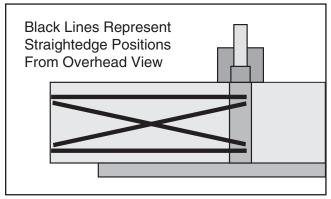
Straightedge positions for verifying if outfeed table is parallel with cutterhead.
